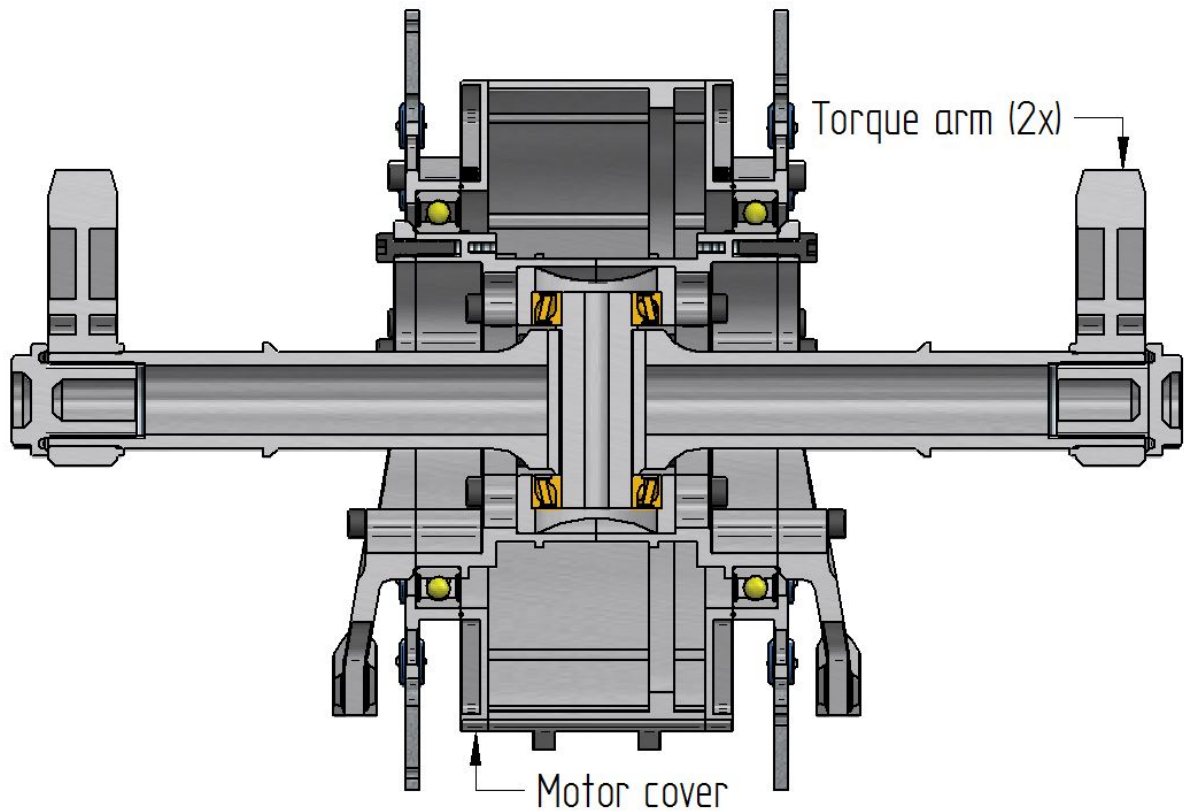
The axle-hub assembly supplemented with the torque arms, motor cover and swing arm bearings.
